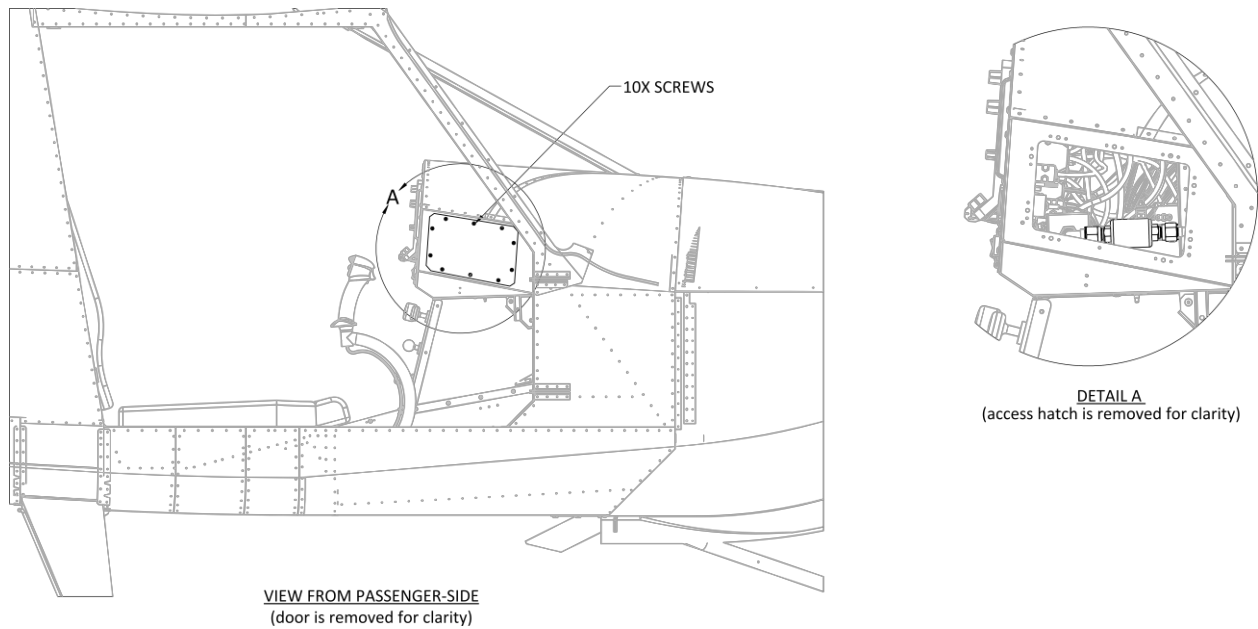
Removal of the panel into the avionics bay on the passenger side.
